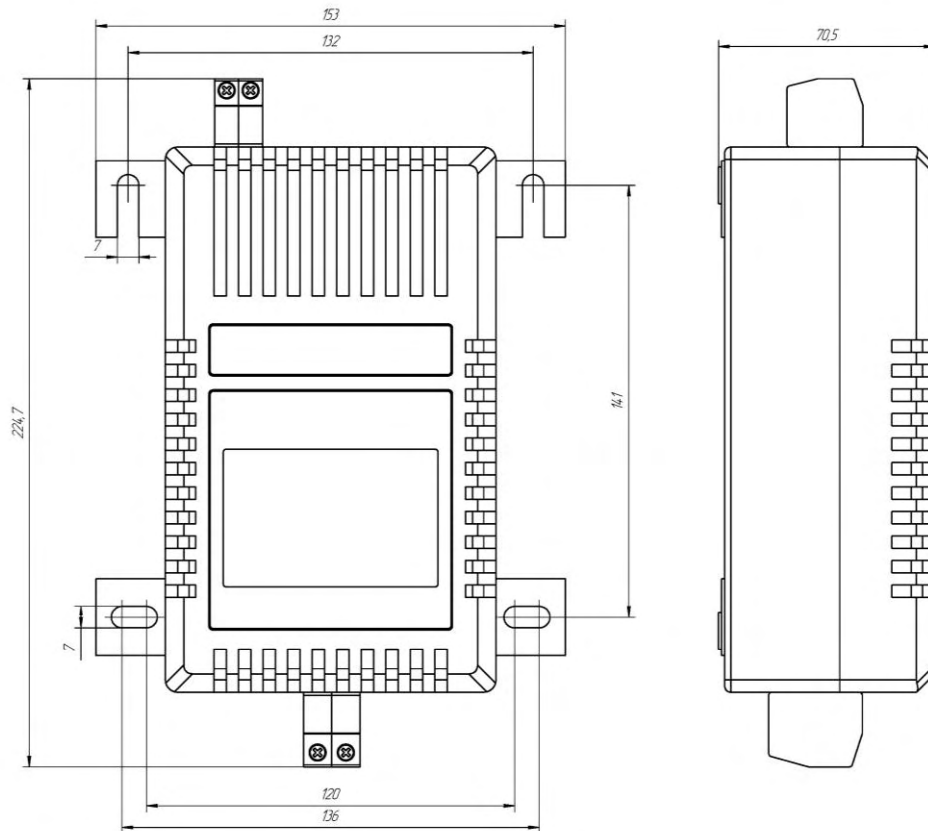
Overall and mounting dimensions of PSU, design versions 800/65 V, 600/65 V and 400/65 V
